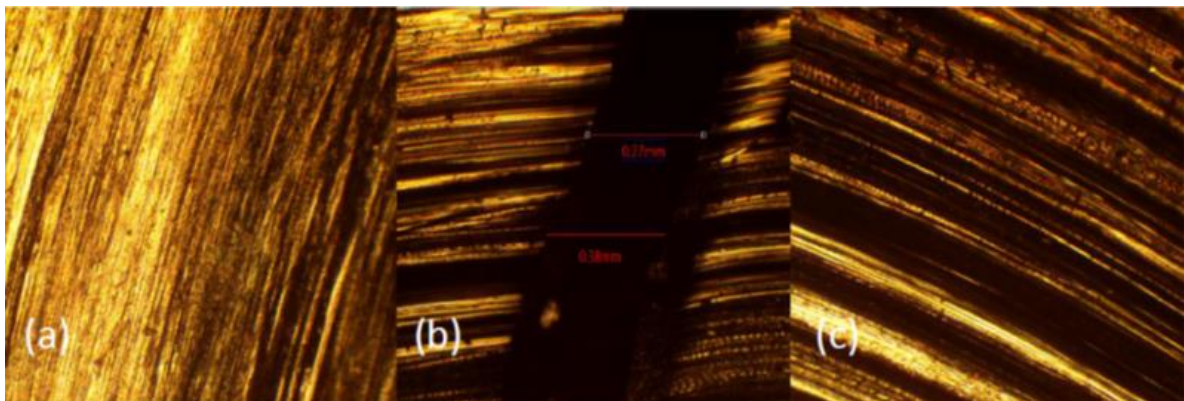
Rotational speed of 350 rpm: (a) Mg side of the weld; (b) 0.37 mm crack in SZ; (c) Al side of the weld
